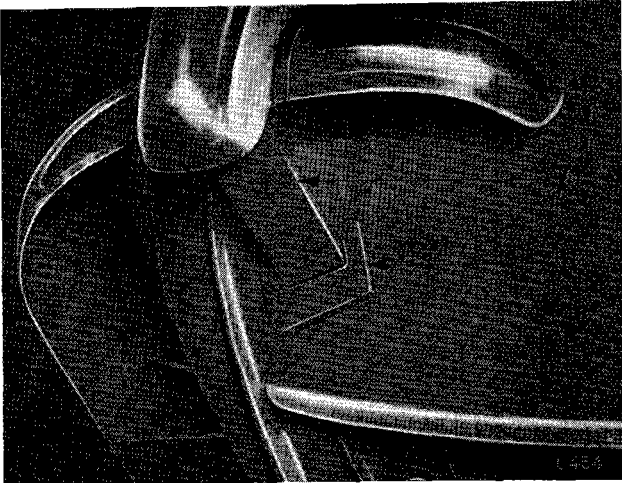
Rear bumper underside attachment (Spitfire 4 and Mk. 2)
